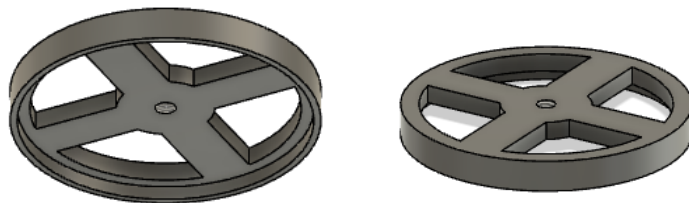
Mould cap with four holes to facilitate the mould filling process.
